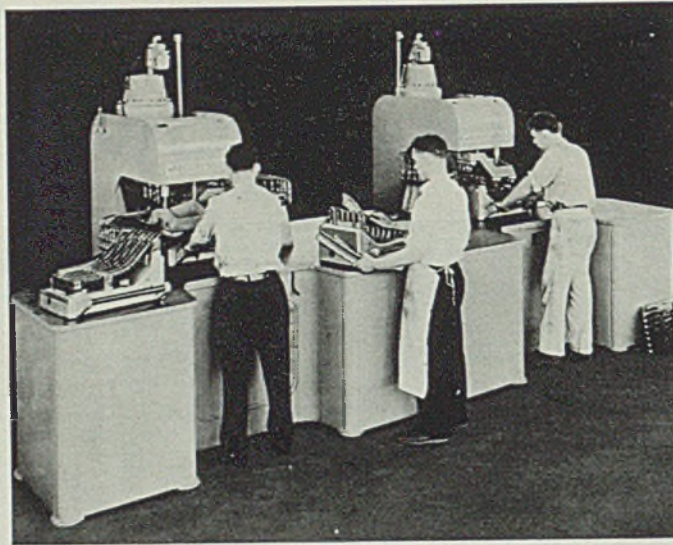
Some 4000 spot welds assembled 1000 stampings into 100 radiator grille halves per hour in this novel assembly welding setup
